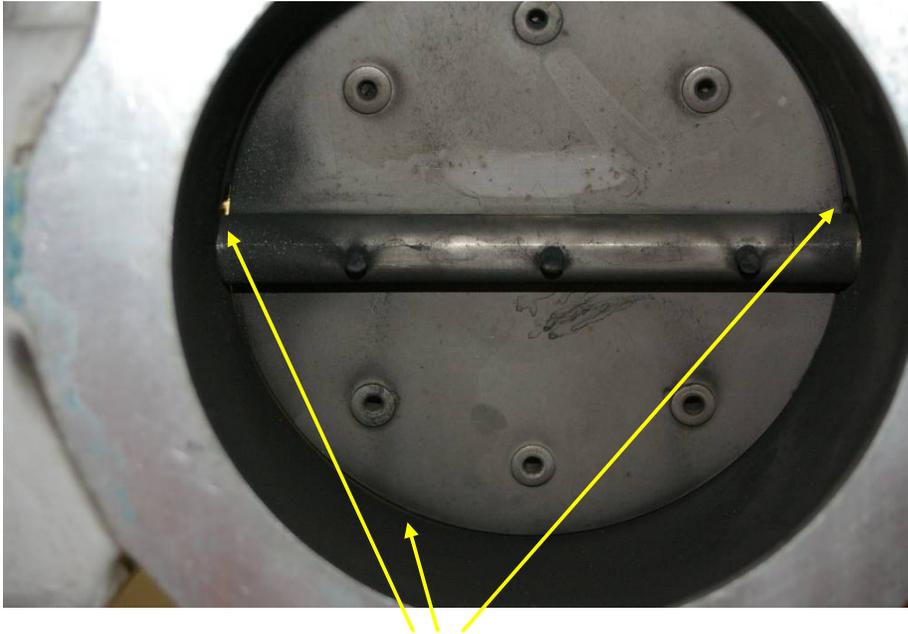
photo showing gaps around butterfly valve plate & at shaft ends.
